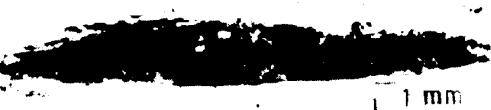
Typical sliver defect on the laboratory cold rolled sheet
